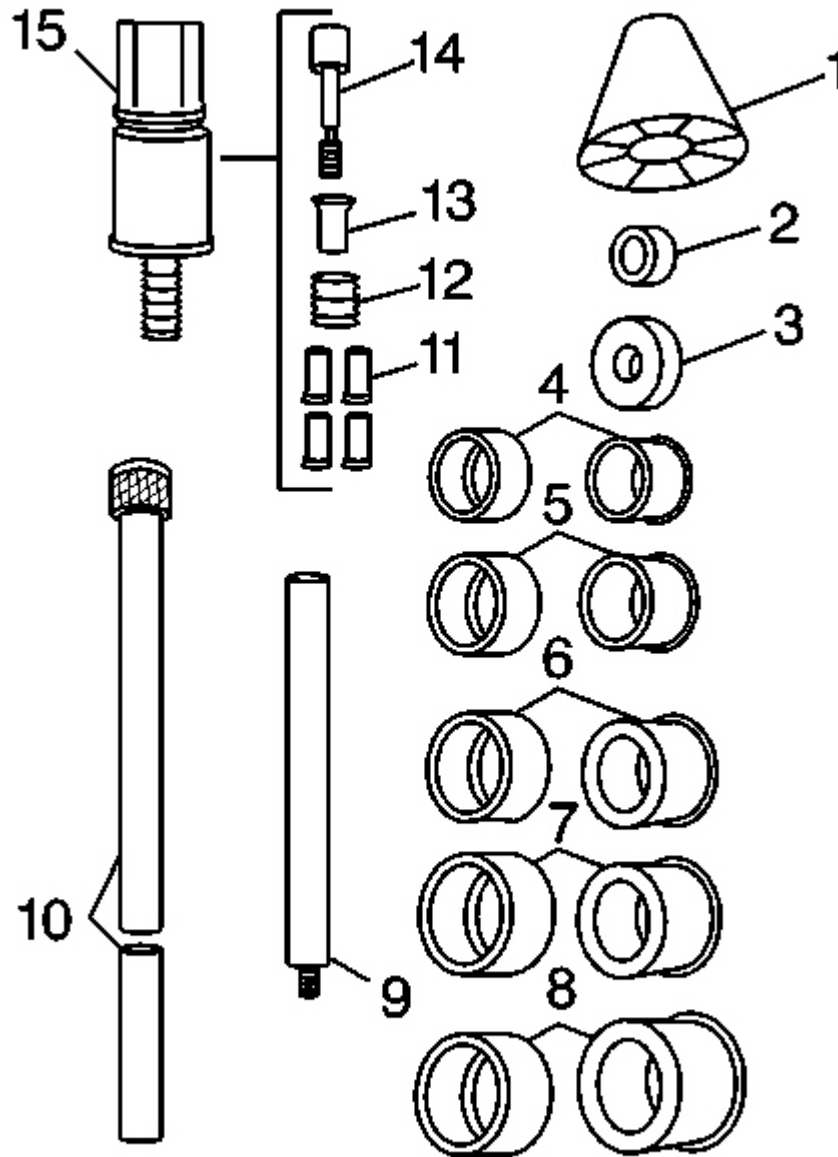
View Of J 33049 Camshaft Bearing Service Kit Components
